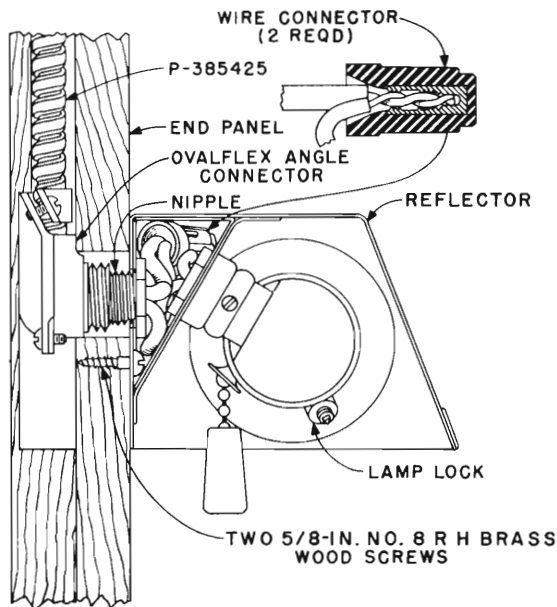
3A Light Fixture Viewed from Within the Booth
